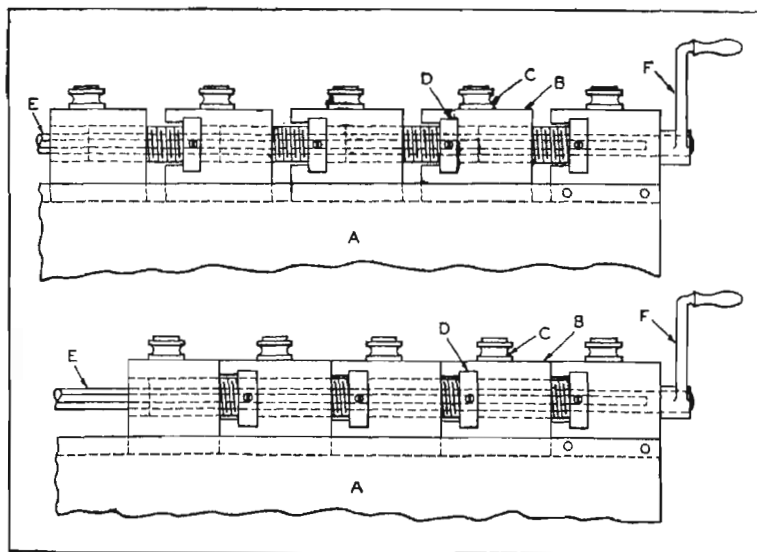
Mechanism for Obtaining Uniform Adjustment of Spacing between Rollers *C*.
